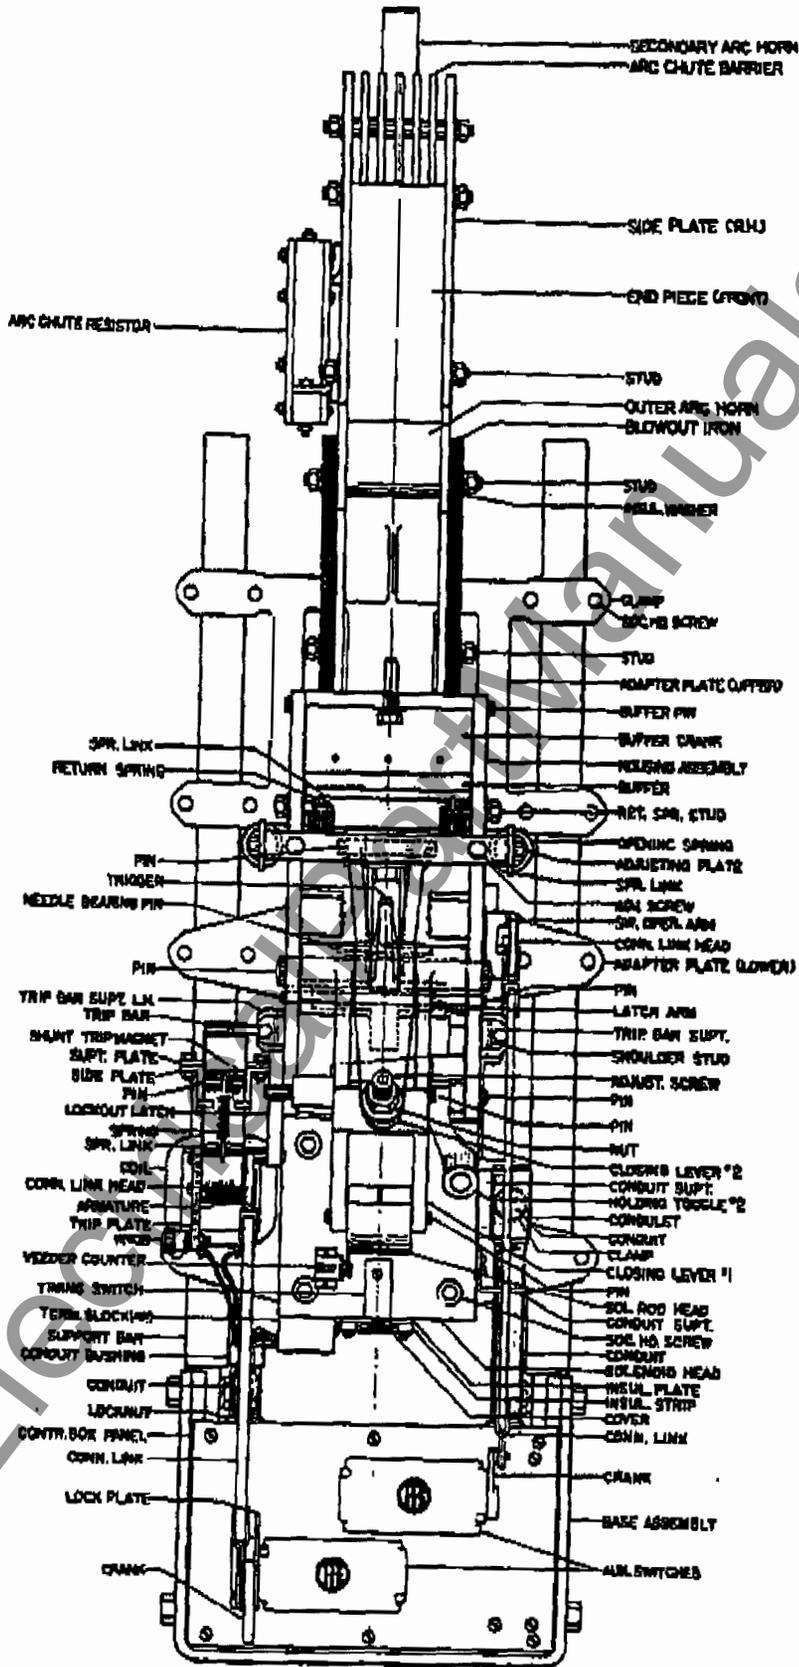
Type MT Circuit Breaker for Pedestal Mounting
